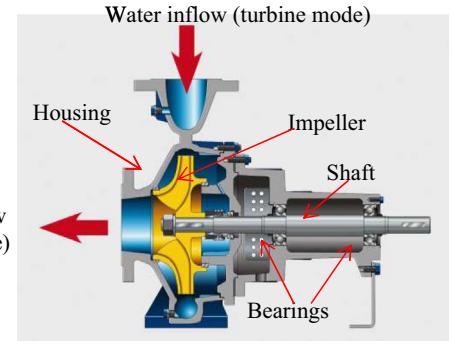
Cut-view of Pump-as-turbine showing impeller and direction of water flow [32].
